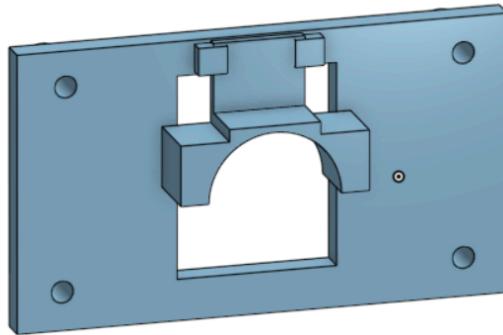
Above is a custom-made 3D-printed mount that we used to fasten the solenoid valves to and attach on the component wall. The solenoid valve slots in and the little rectangular/U-shaped section slides down to lock the valve into place.
